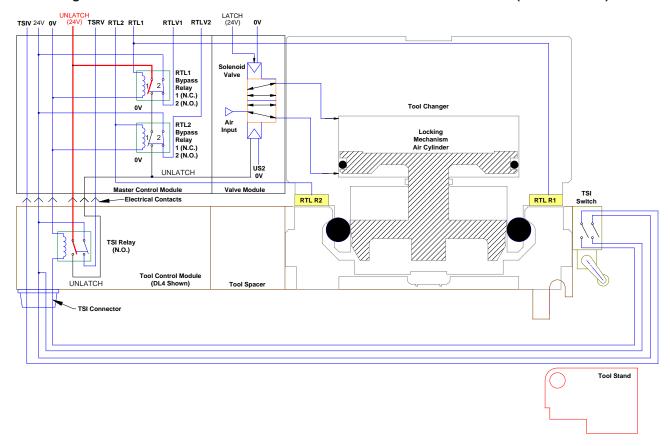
TSI Circuit with Master and Tool Locked (DL4-T Shown)
